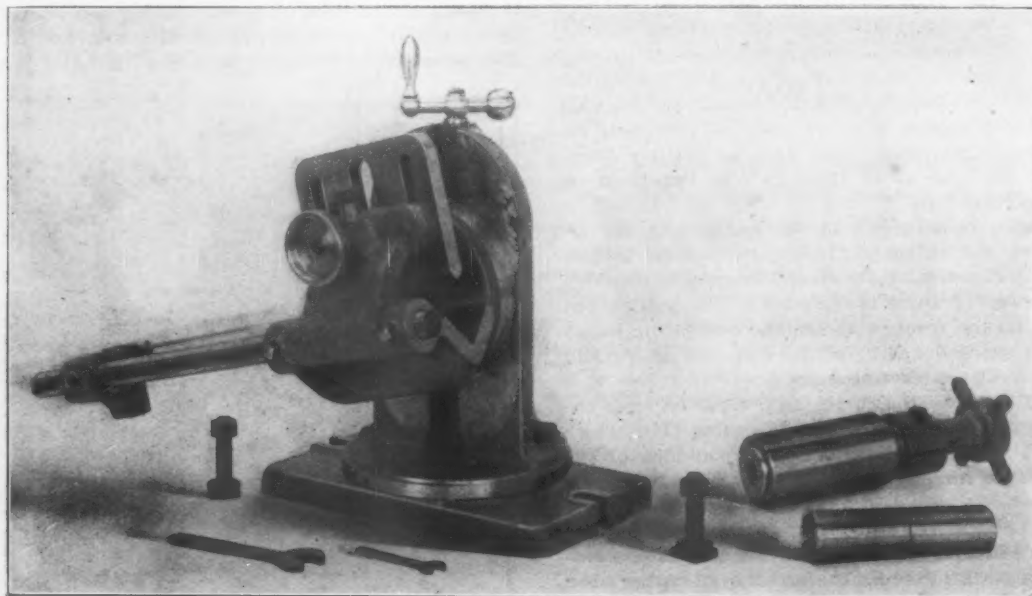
A Universal Head for Supporting Cutters and Tools While Being Sharpened on Brown & Sharpe Universal Grinding Machines.
